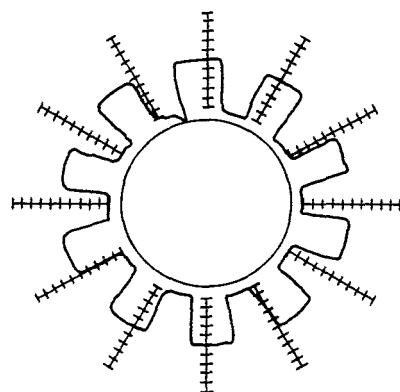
Circumferential surface profile trace of journal J-14. Scale: 250 micro-inches (0.006 mm) per division.
